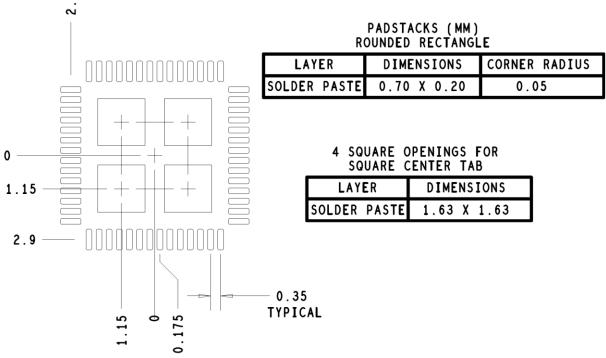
Recommended PCB Footprint Pad and Soldermask Dimensions IMPINJ RECOMMENDED PAD PATTERN
